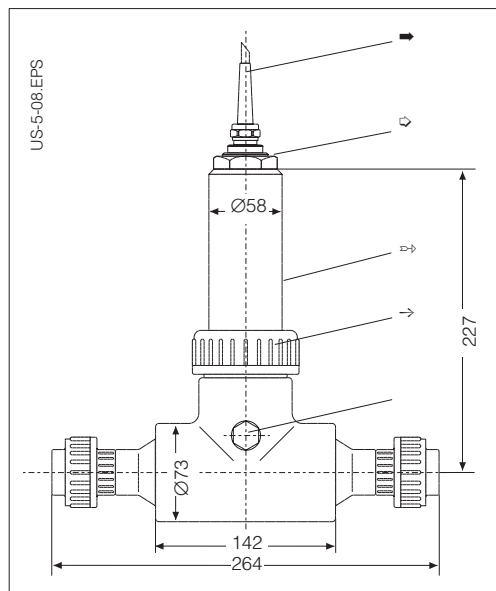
CUA 250-A with screwed adhesive fitting DN 25
